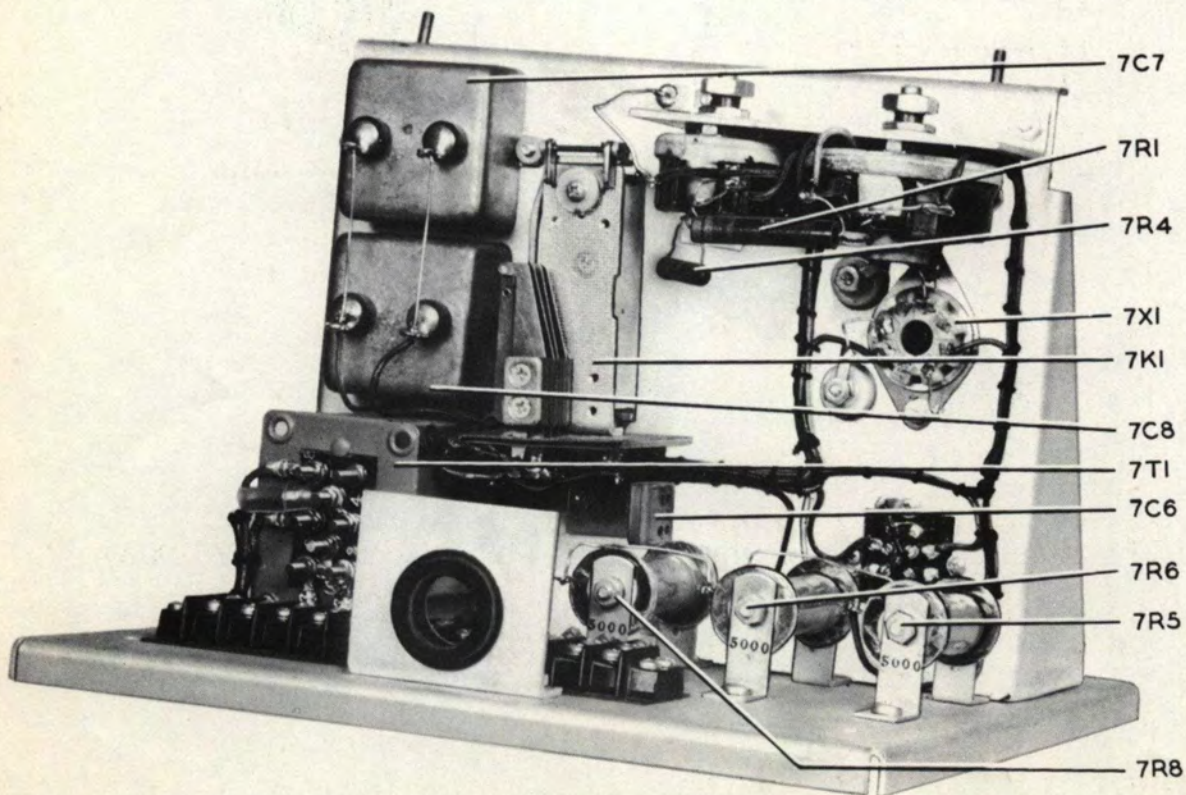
Monitor Rectifier Unit, Bottom View, Parts Identified (SY6108A)
